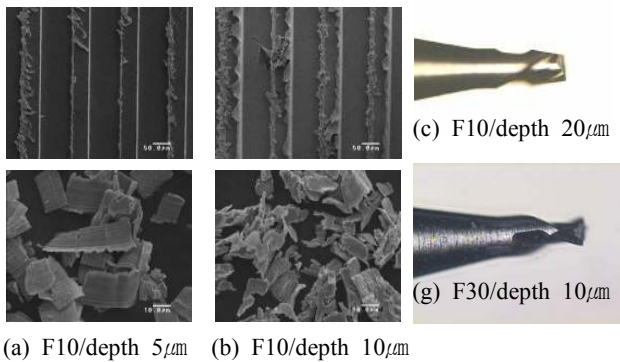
Machined surface of micro channel structure and chip formations and broken tools with cutting conditions
